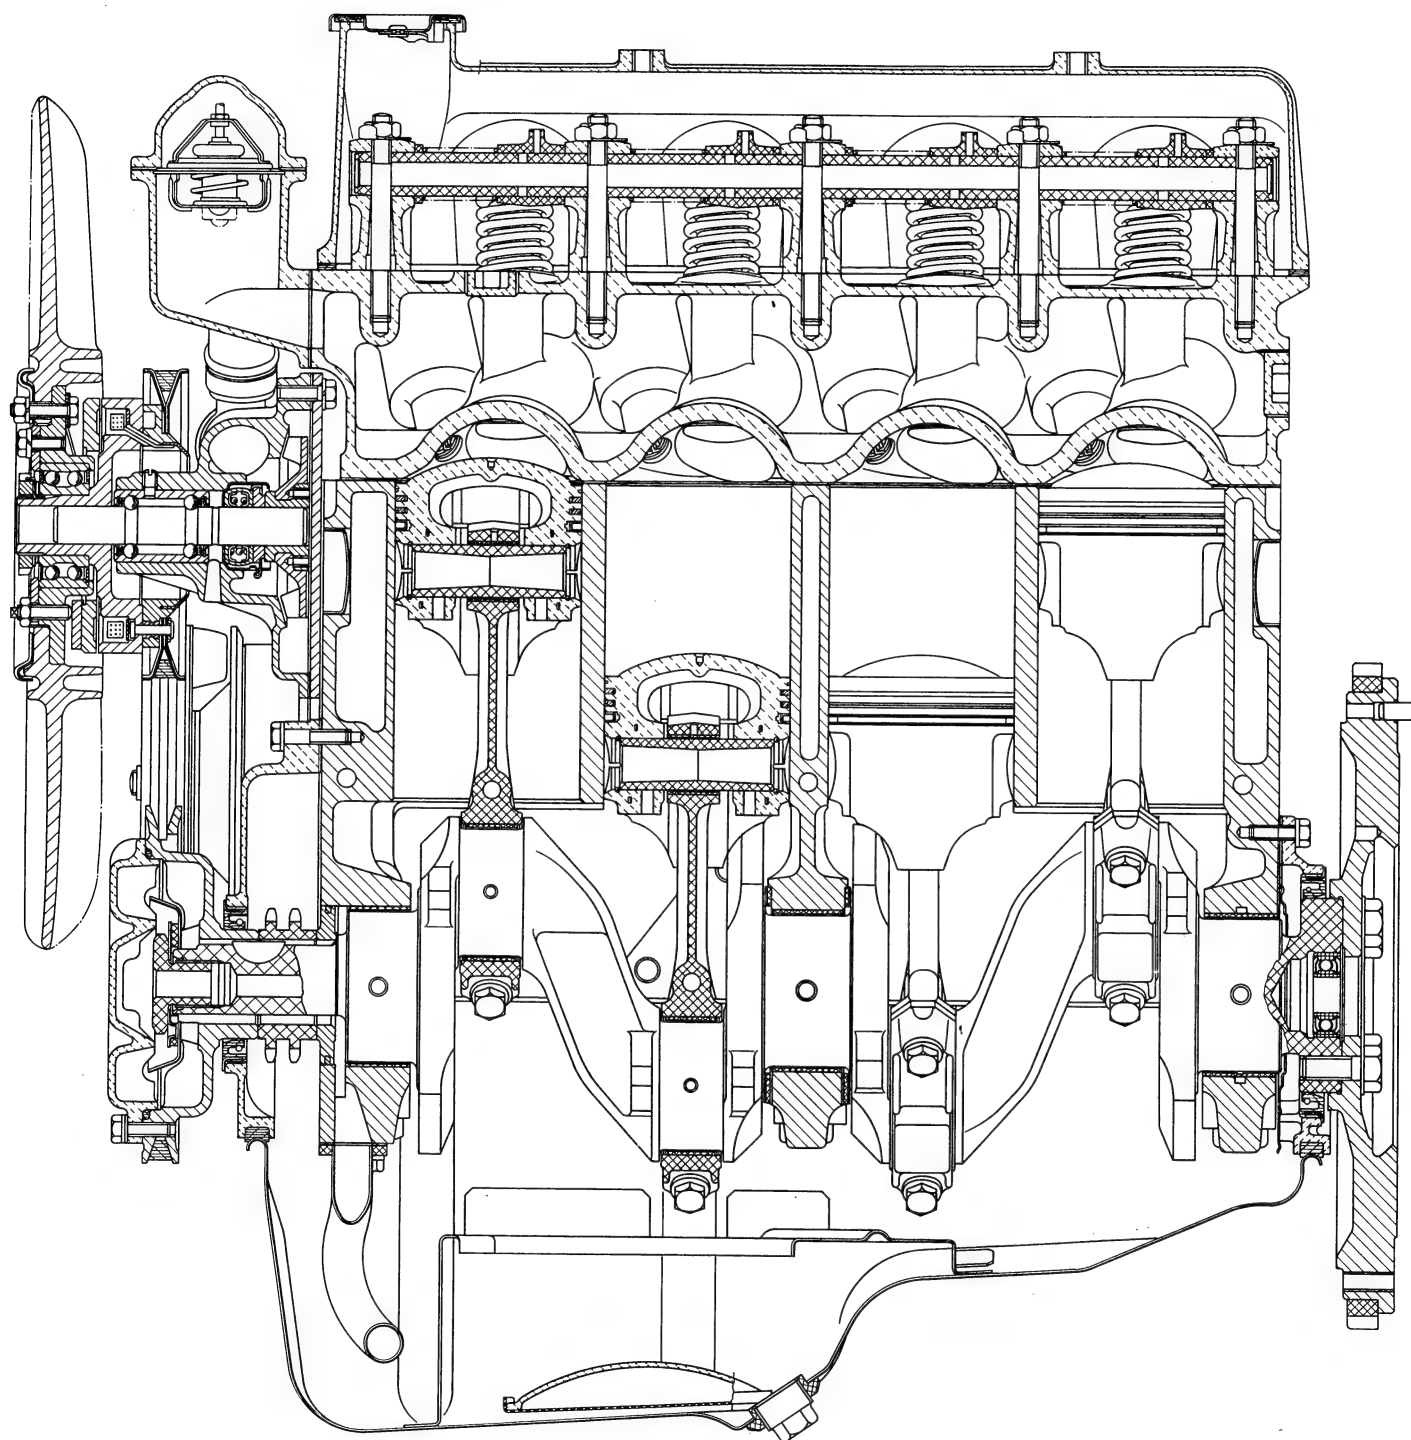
Side sectional view of engine 115 C.005 across cylinders.
